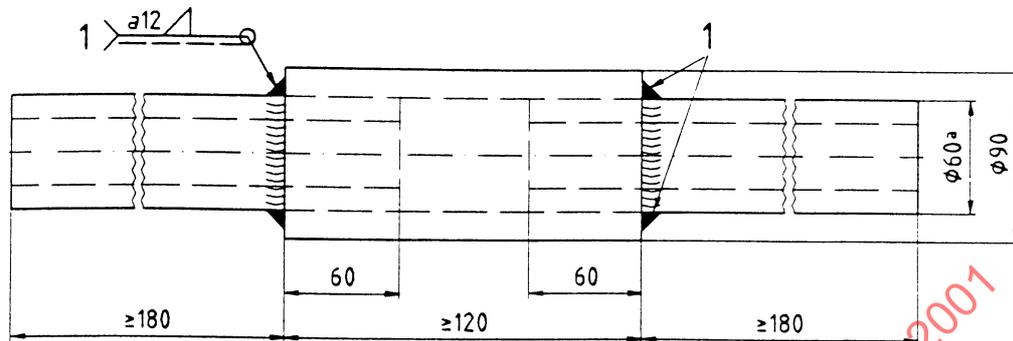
Fillet weld shear strength specimen, transverse from plate
